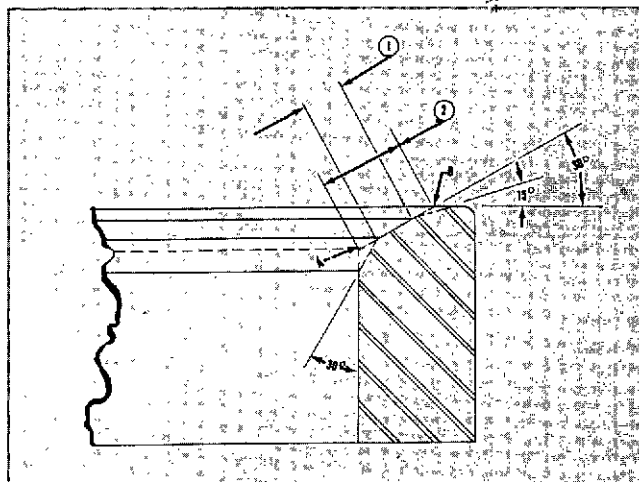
, N10228. Valve seat insert—cross sections
